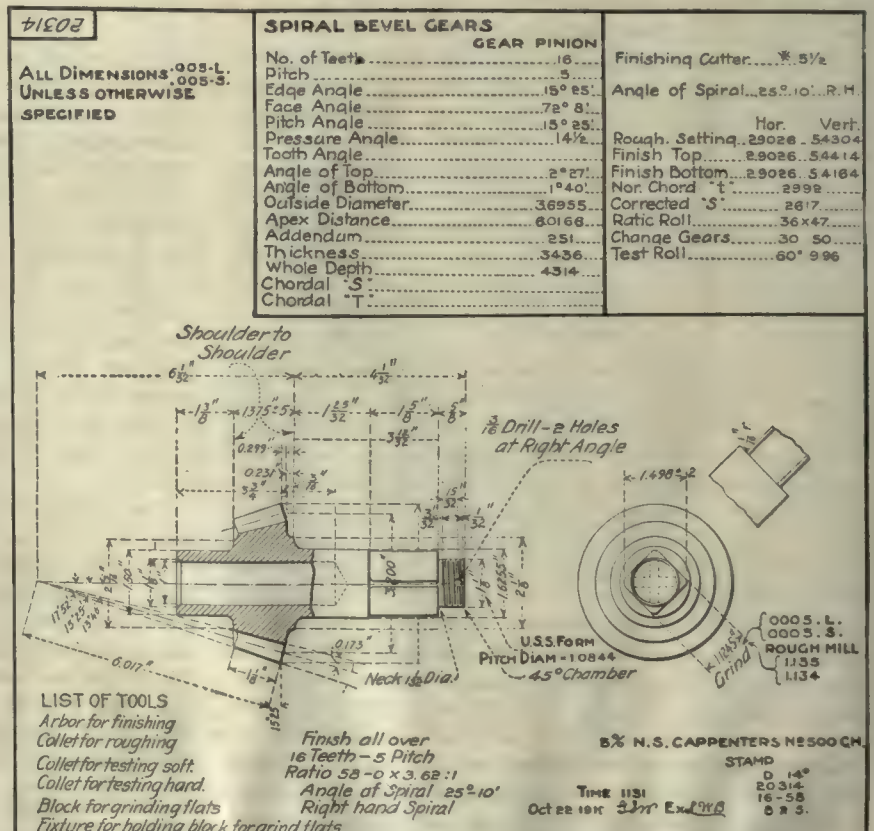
SAMPLE OF DRAWING FURNISHED FOR ESTIMATING ON GEAR WORK
